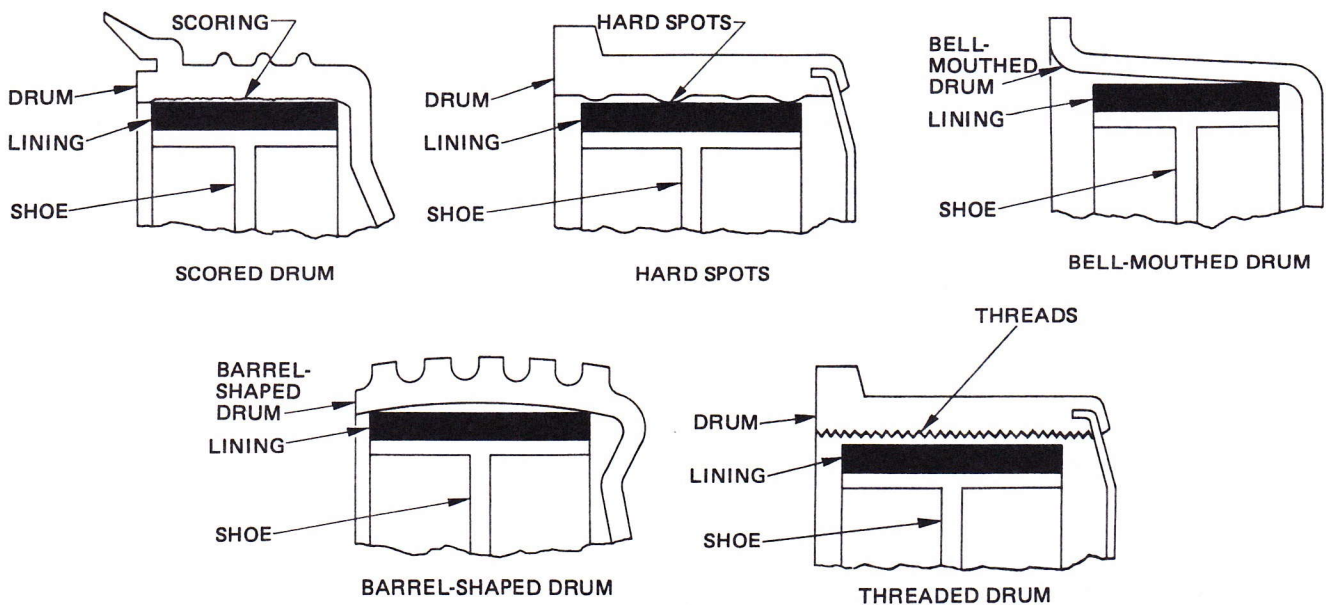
Various brake-drum defects that require drum service. (Bear Manufacturing Company)
